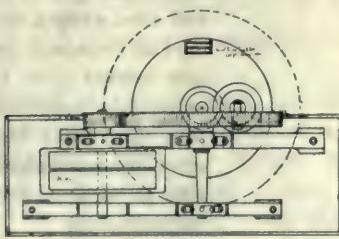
TOP GEAR 6-IN. BOREHOLE PUMP.
